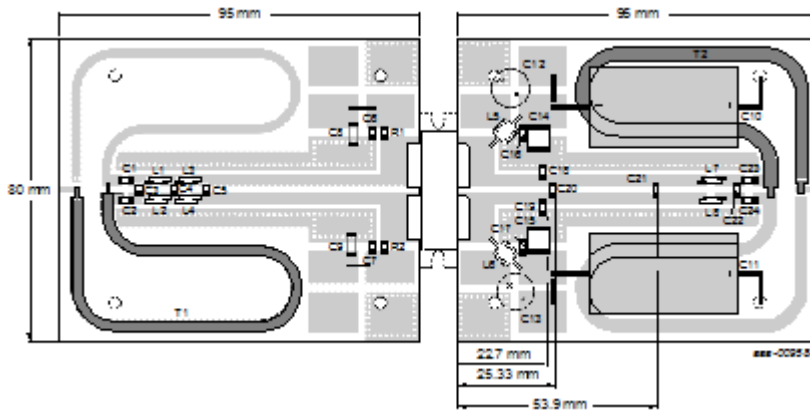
Printed-Circuit Board (PCB) used has the specifications of RF 35; $\epsilon_r = 3.5$; thickness = 0.765 mm
